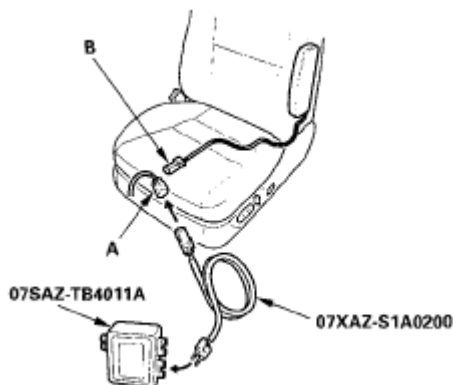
Identifying Left Side Wire Harness 2P Connector And Driver's Side Airbag
